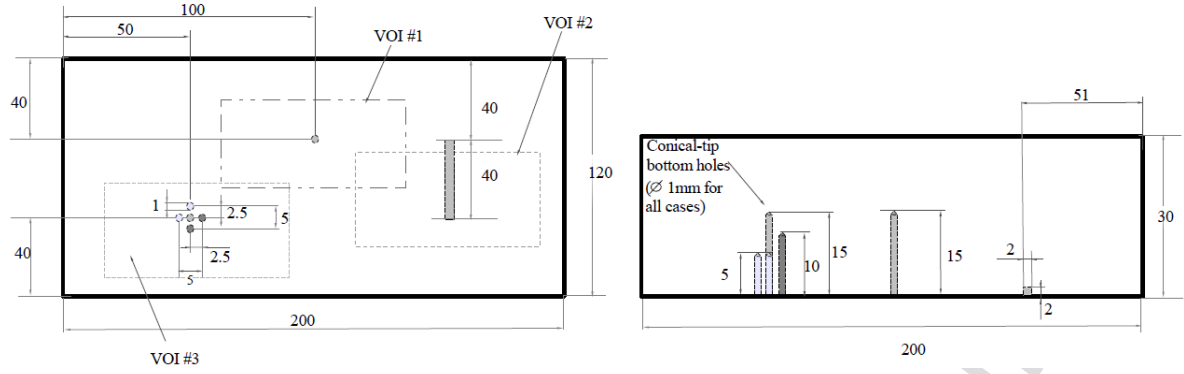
Aluminium test-block used for contact testing. A) - Top view. B) - Side view.
